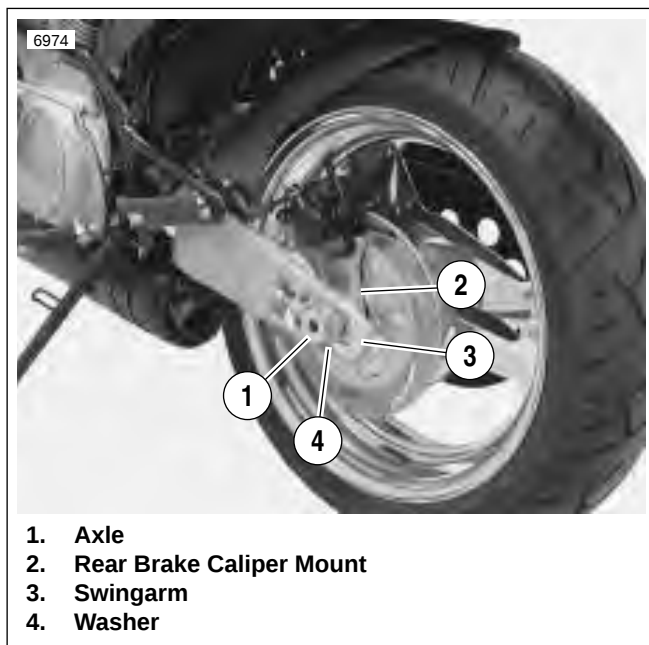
Rear Wheel With Axle Carrier (Left Side)
